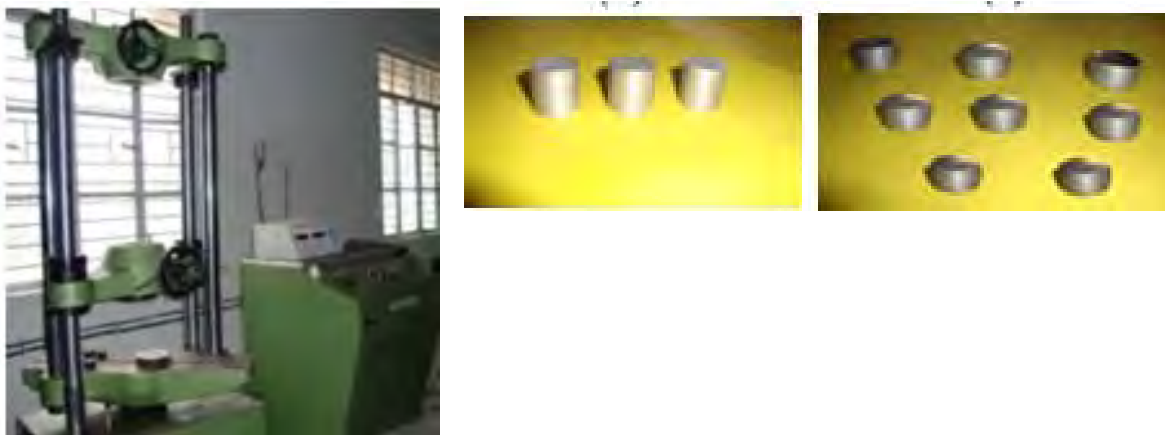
Real photo of used universal testing machine (UTM) and test specimens before and after testing
